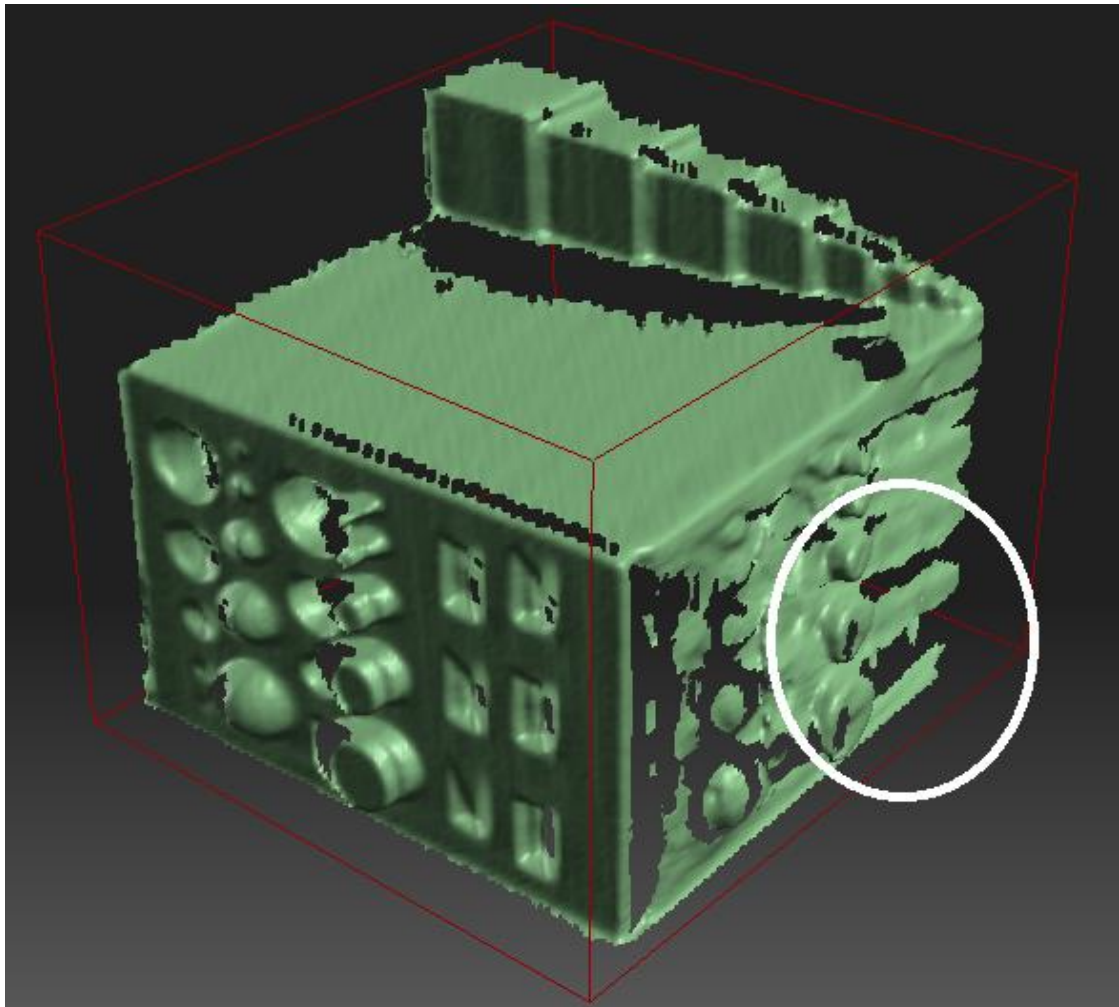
Feature Casting a Shadow on First Structured Light Scan of Test Cube
